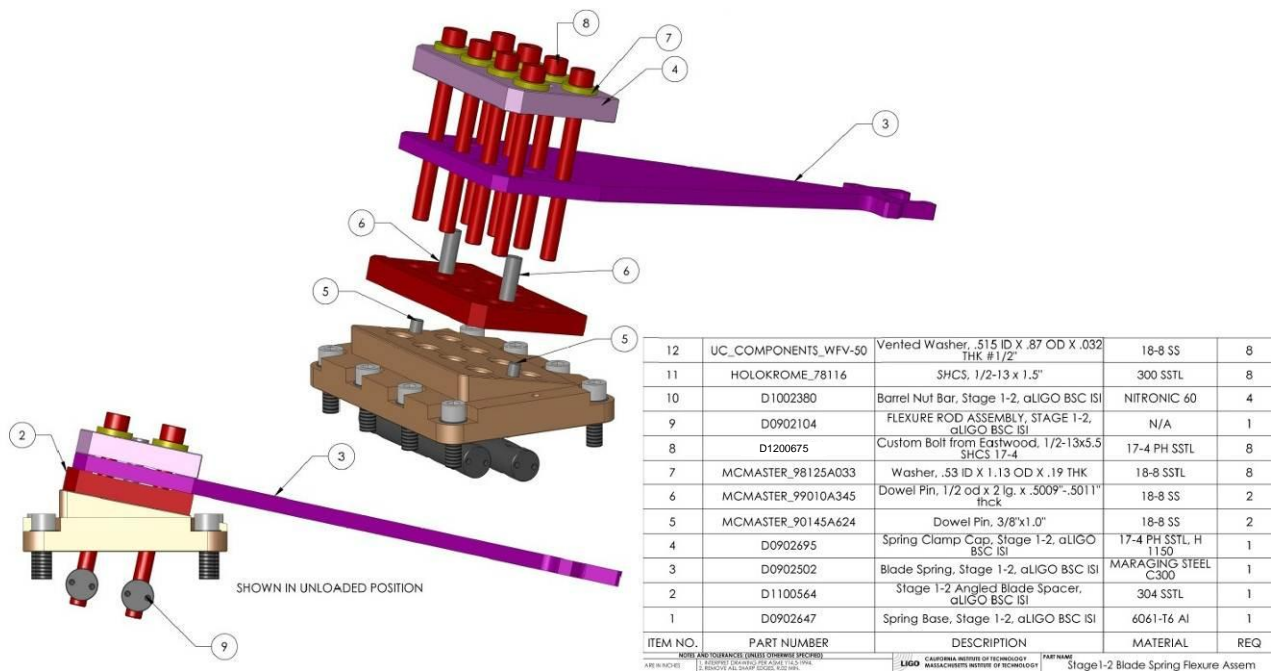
D0902485 Stage 1-2 Blade Assembly Exploded View
